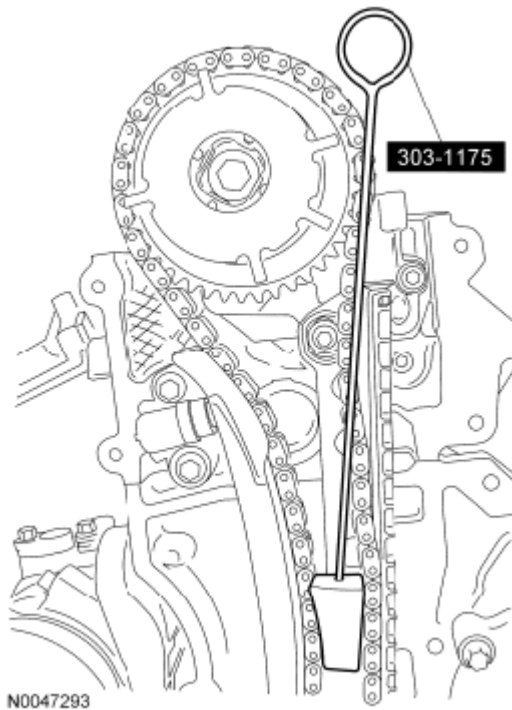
Identifying Timing Chain Locking Tool In RH Timing Chain
